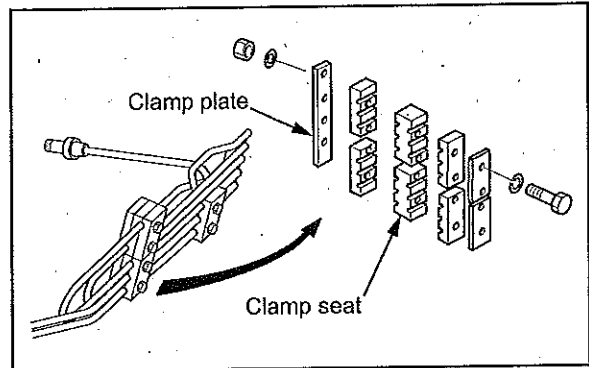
High pressure fuel injection pipe and Clamp seat - Inspect
